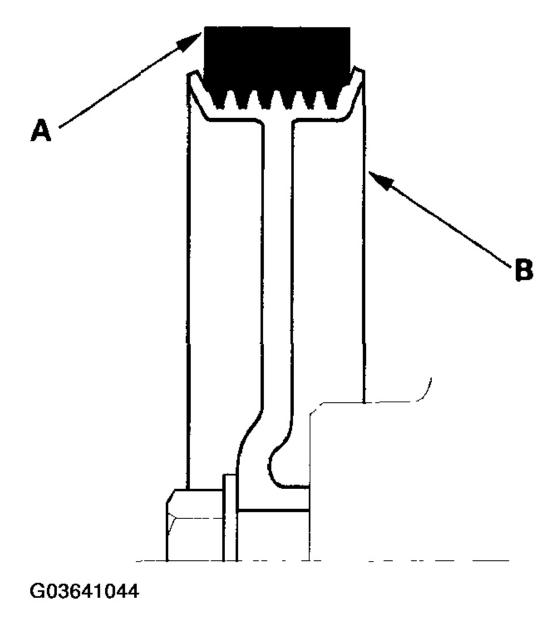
Installing Drive Belt Courtesy of AMERICAN HONDA MOTOR CO., INC.
